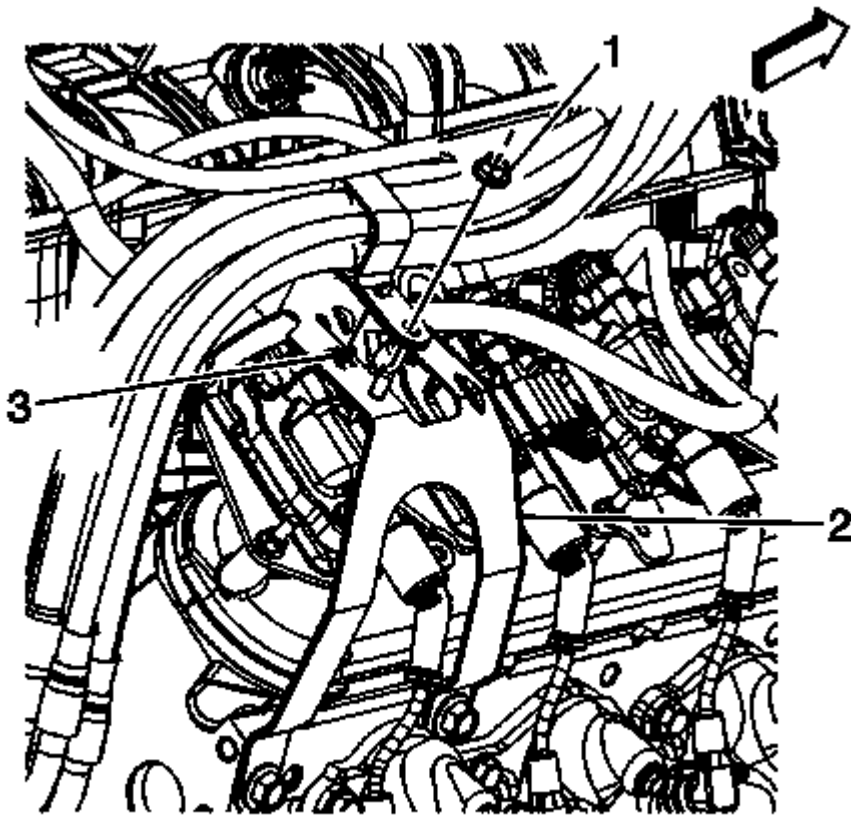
3-Phase Cable Clip Nut And Engine Bracket
